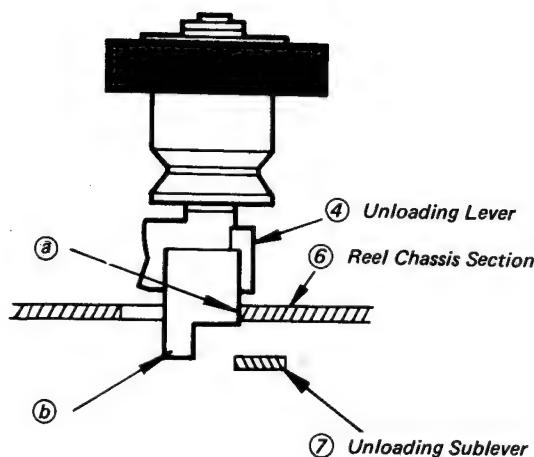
View C Showing Unloading Lever Fitted Withreel Chassis Section
